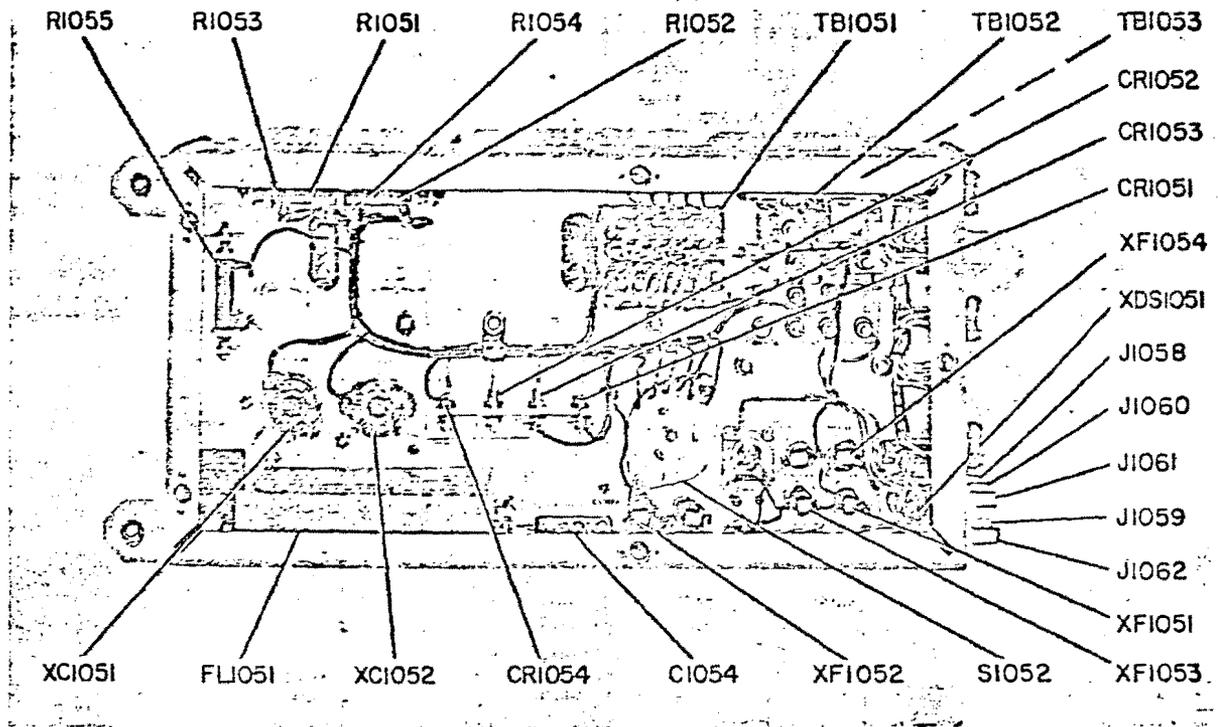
Oscillator-Power Supply O-928/FLR, Bottom View, Location of Parts
